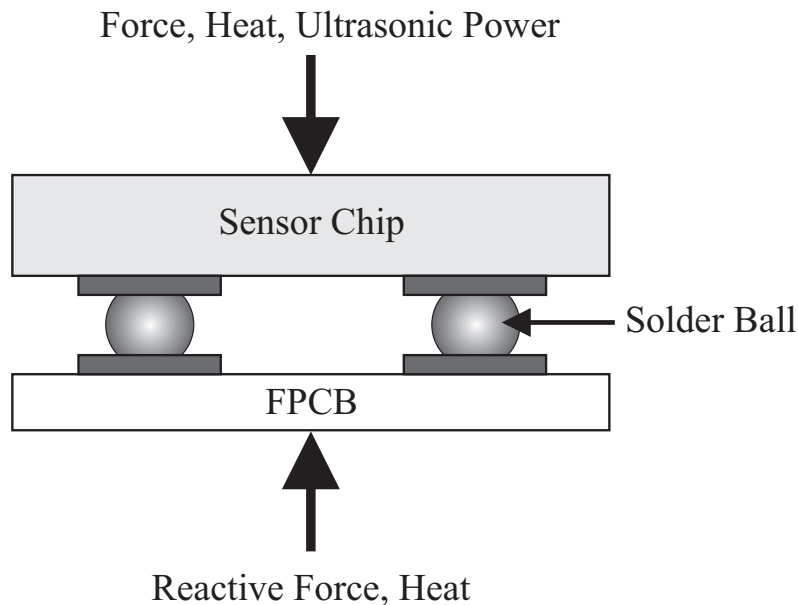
A schematic of a flip-chip bond. Heat, force, and ultrasonic power are being used to melt solder balls which have been placed on the contact pads of an FPCB.
